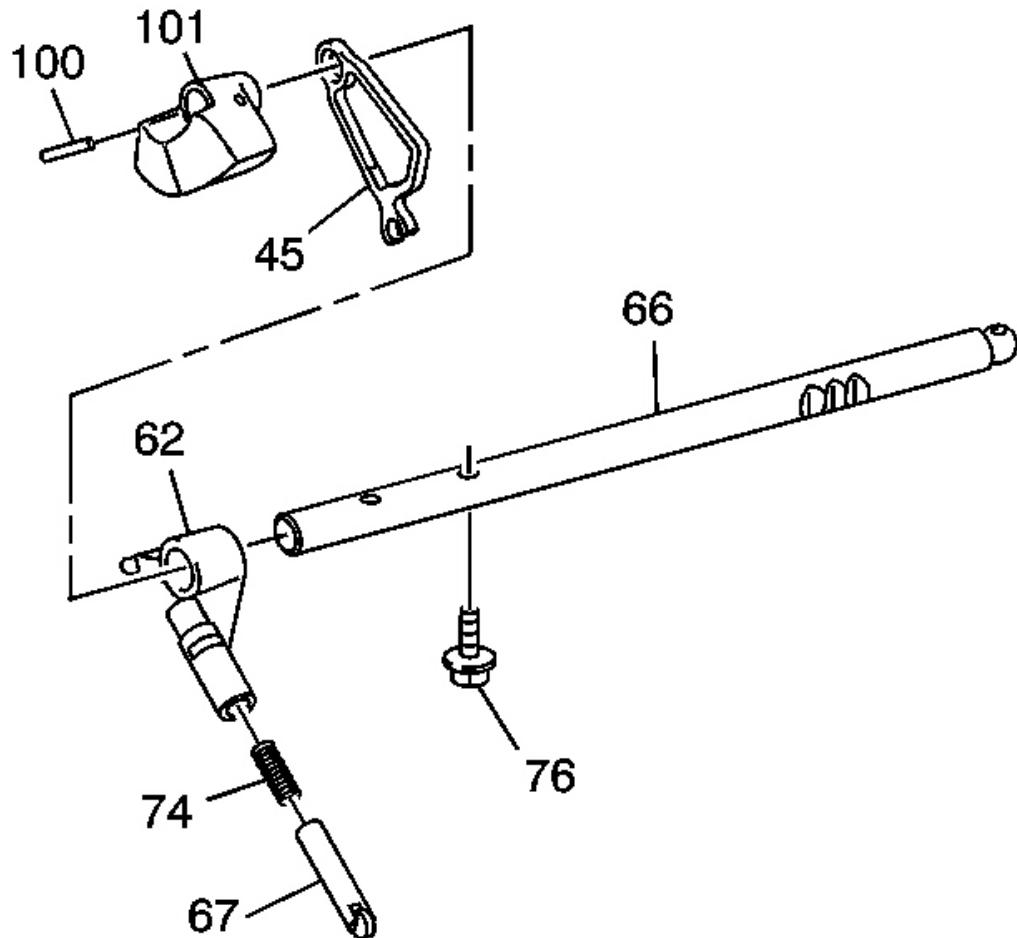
View Of Shift Control Shaft, Shift Shaft Detent & Components
